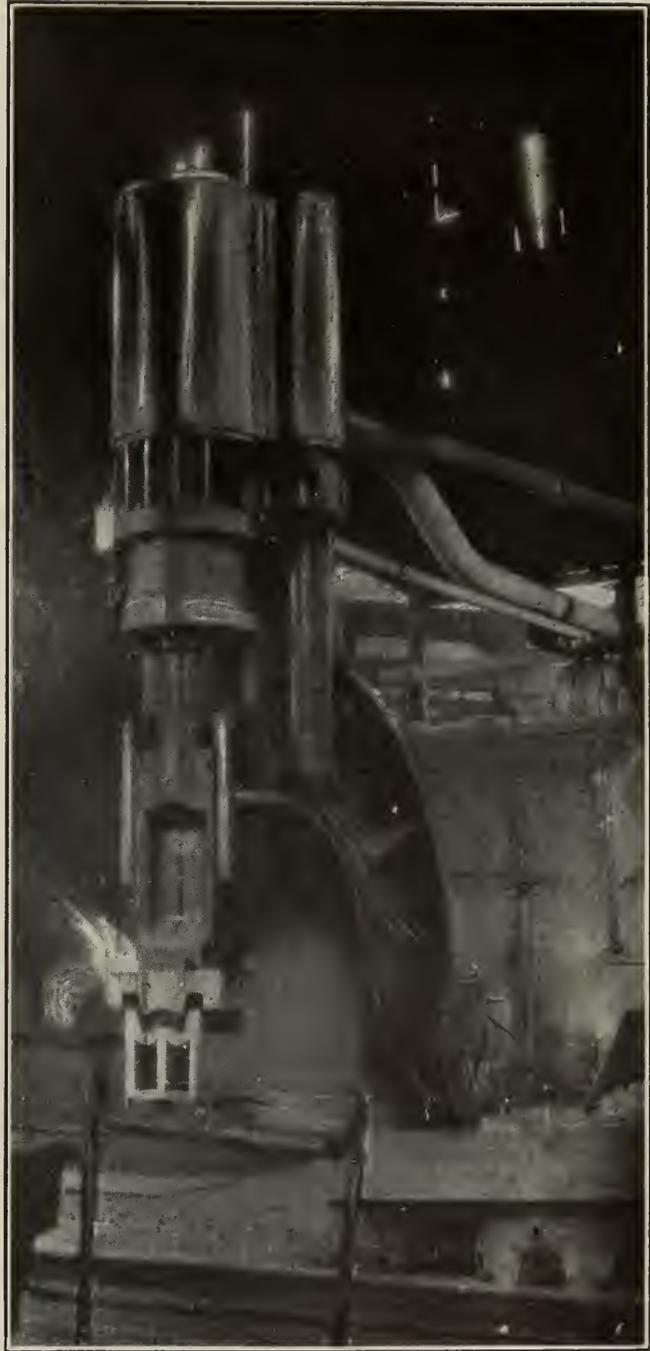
STEAM HYDRAULIC FLANGING PRESS AT THE MILAN WORKS.
